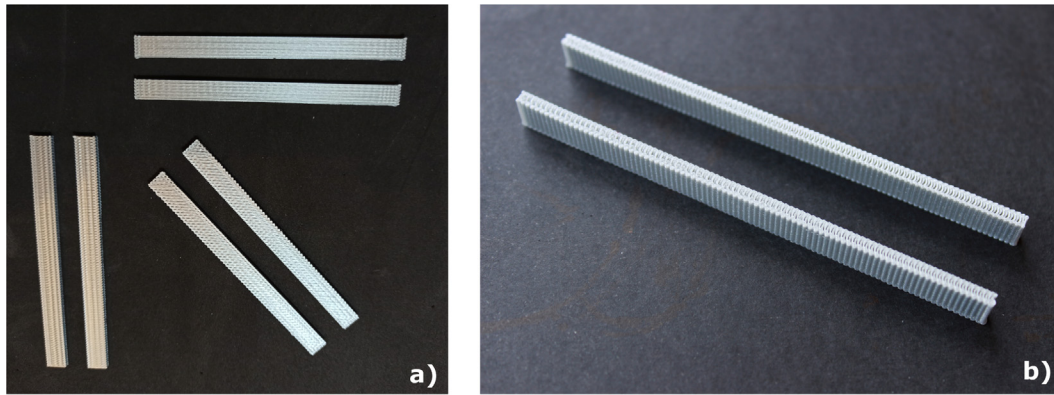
3D printed rectangular prisms built on flat, a), and built on edge, b).
